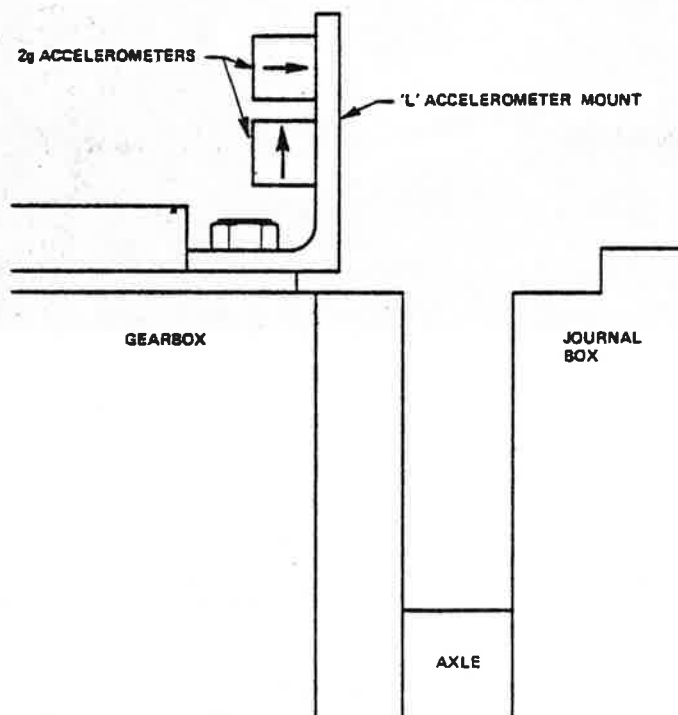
PATCO GEARBOX MOUNTED ACCELEROMETERS.
